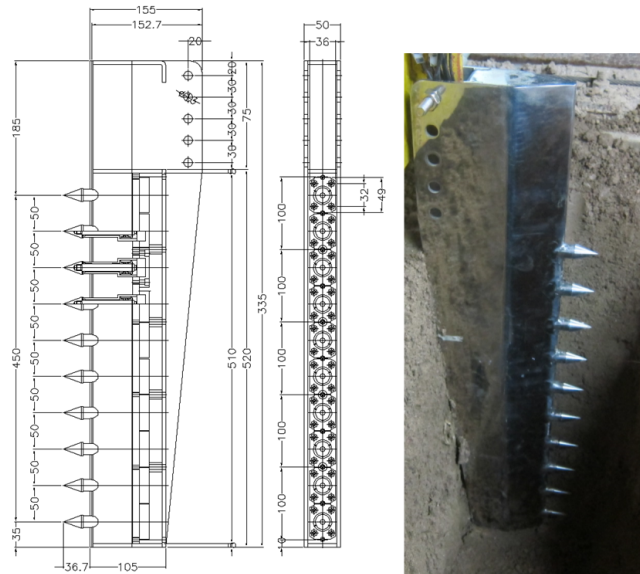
View of real-time horizontal soil strength device. Drawing (left) and photo (right) of the sensor and blade assembly (unit: mm).
